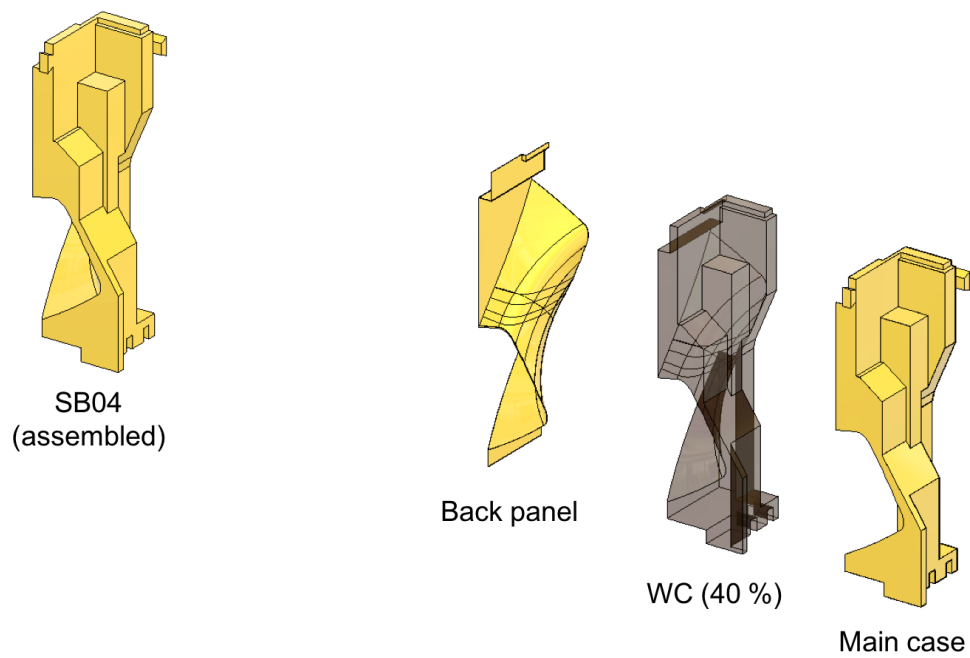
An exploded view of SB04 (same as Fig. 9).
